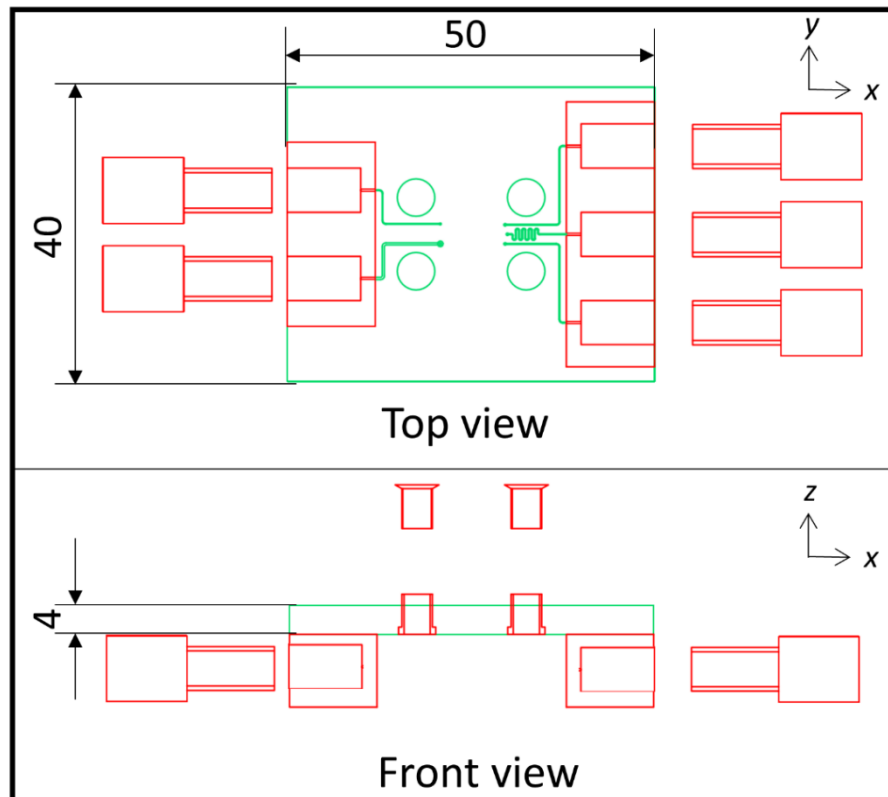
Device baseplate and fittings. The baseplate design is shown in green and the larger macroscale fittings are shown in red. The smaller fittings (red) shown in the front view of the device enable the fixing assembly of the chip and baseplate. The larger screws (also red) apparent in both the top and front views have through holes which enable the connection of tubing to the baseplate. These screws are inserted within the PMMA blocks that are fixed to the underside of the baseplate. All dimensions are in mm.
